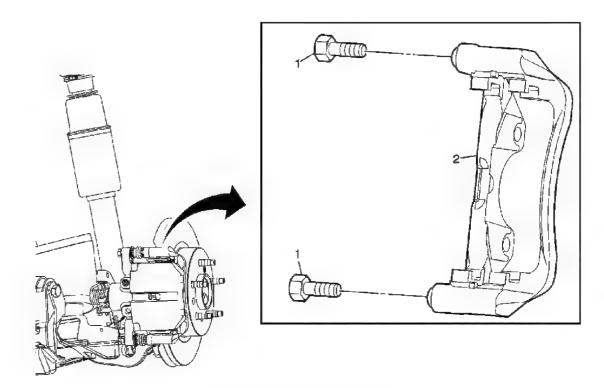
Replacing Rear Brake Caliper Bracket Courtesy of GENERAL MOTORS CORP.
